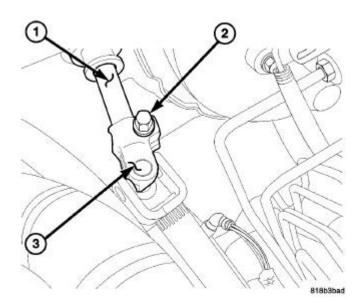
PINCH BOLT AT THE COLUMN SHAFT Courtesy of CHRYSLER LLC
